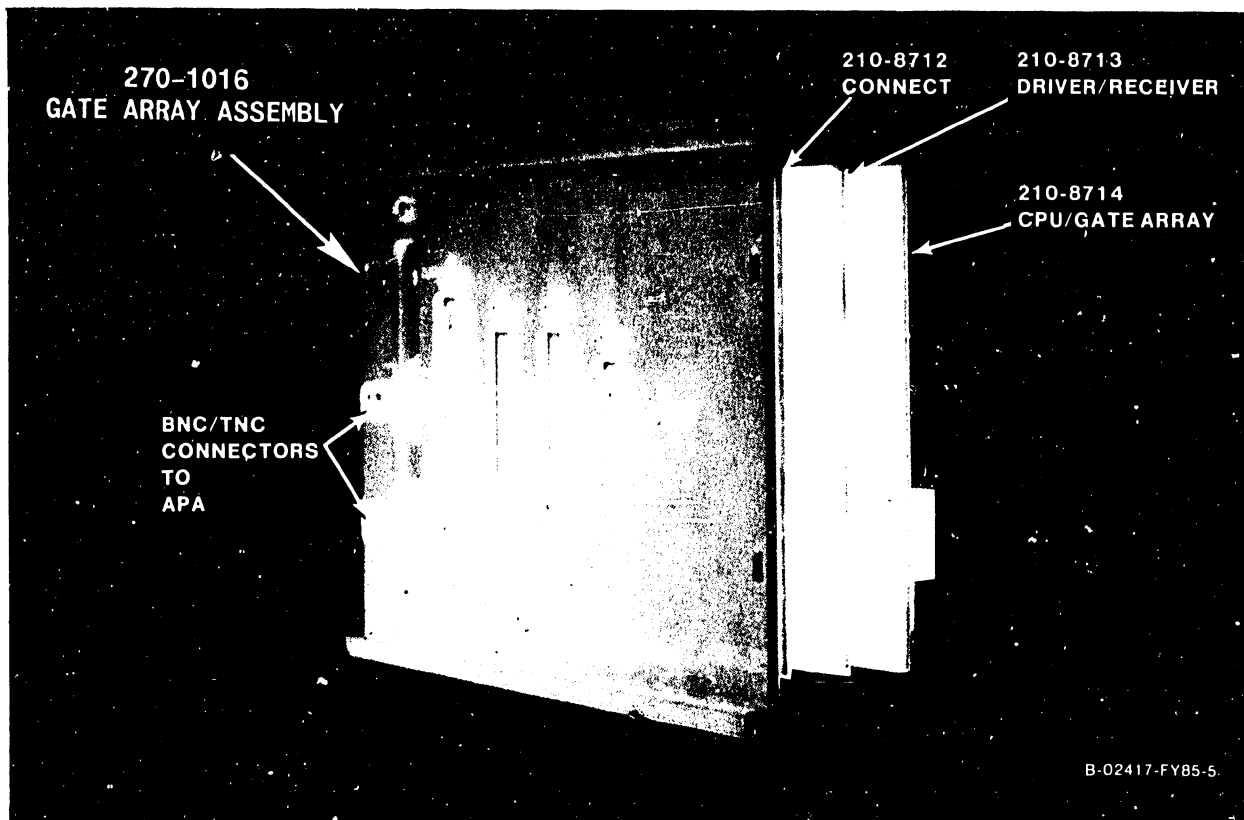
270-1016 6550 Gate Array TC Back Panel Assembly
